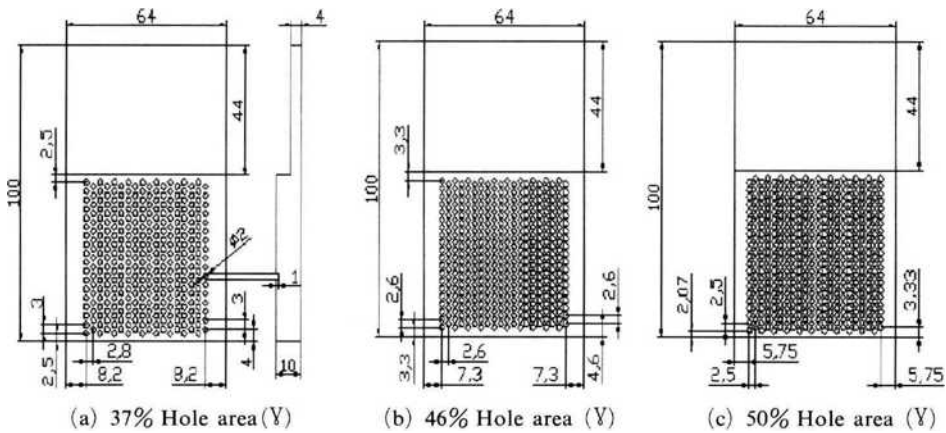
Typical round-hole pattern test specimen (unit : mm)
